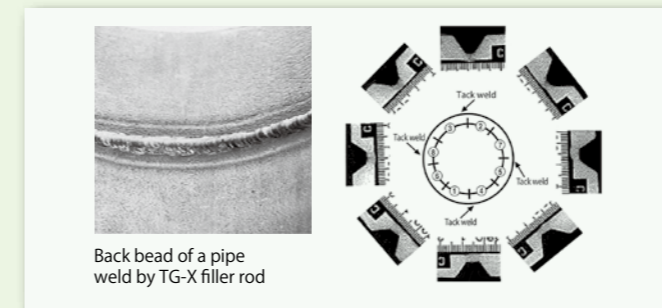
Back bead appearance and macrostructures of TG-X308L welds by pipe root pass welding
